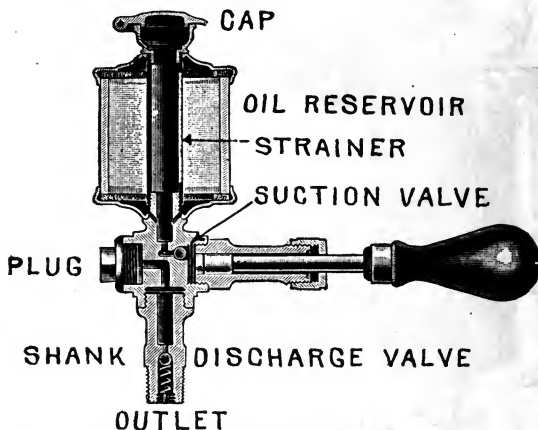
,177.—Nathan hand oil pump; for occasional use in cylinder lubrication. It may be attached either vertically or horizontally by interchanging the shank and plug. A valve should be placed on the outlet, and should be kept closed when the pump is not in use.
